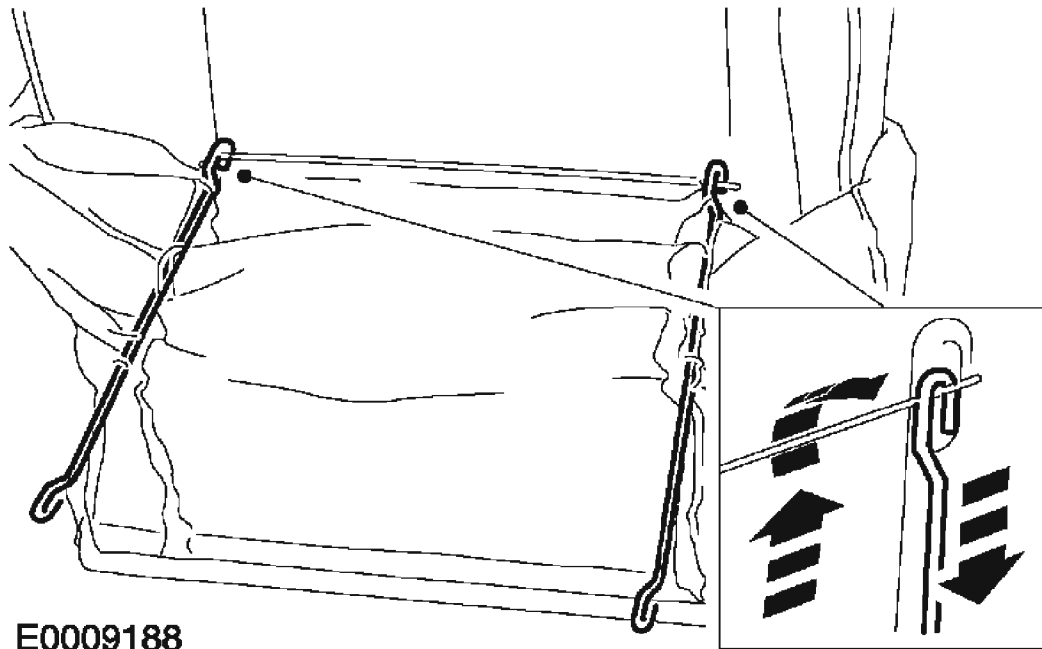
Detaching Lower Ends Of Tensioning Rods From Foam Pad
